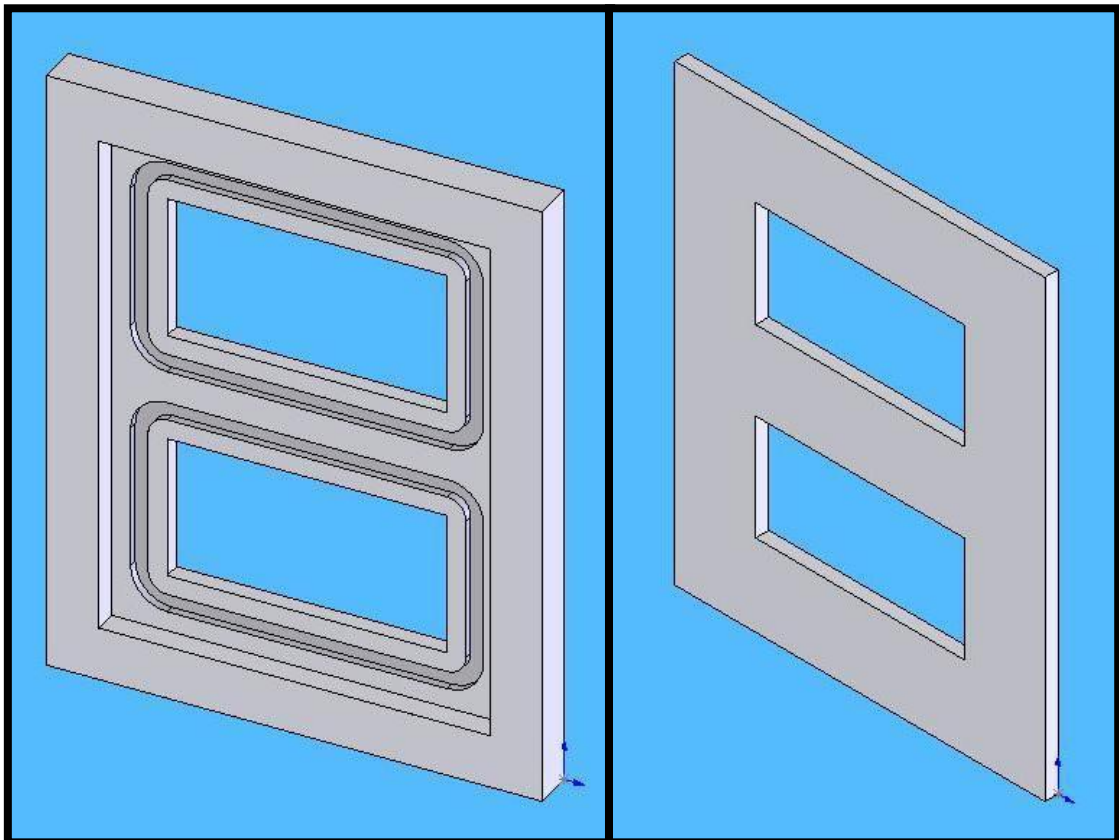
SolidWorks part drawings for Seat Plate (left) and Backing Plate (right).
